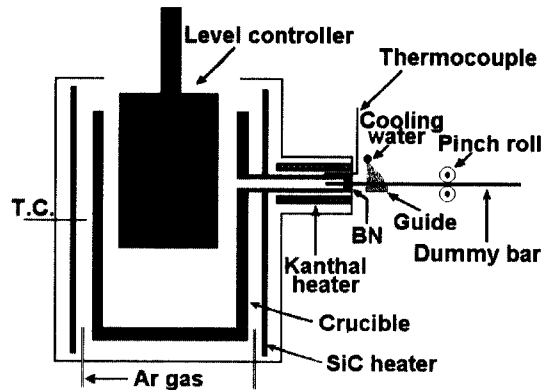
Schematic diagram of the horizontal heated mold continuous casting equipment.
